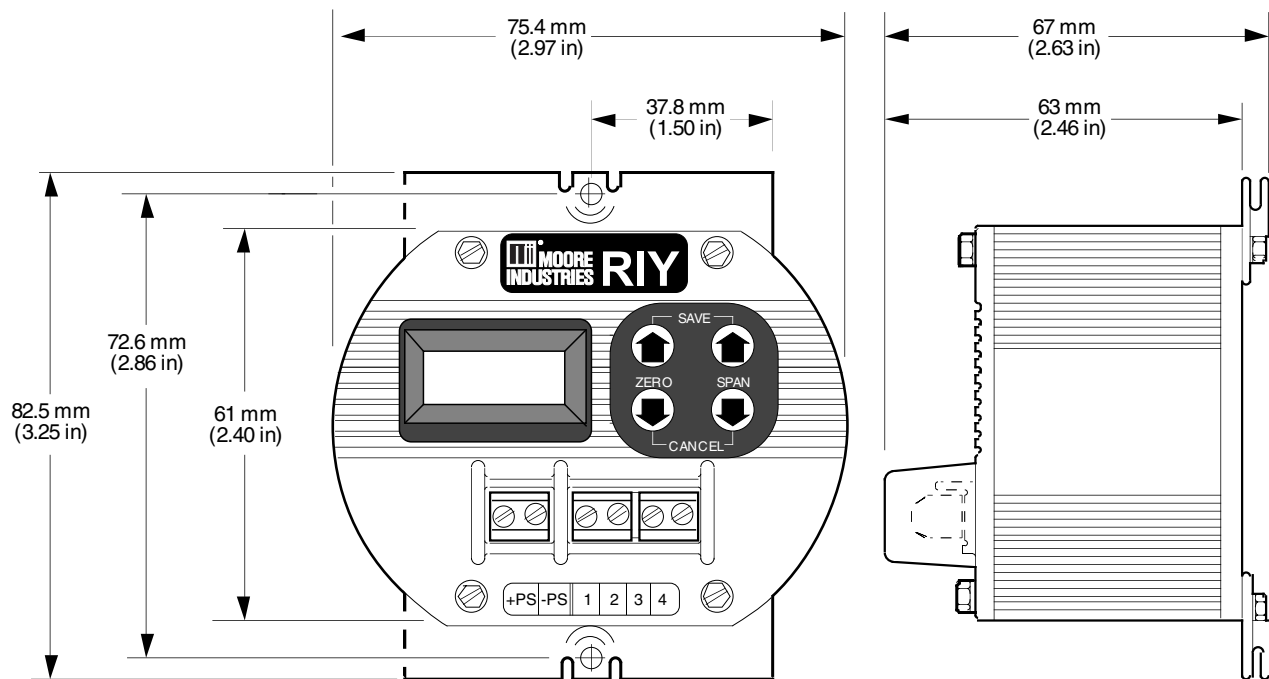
RIY, HP-style Outline Dimension (FL Housing shown)
